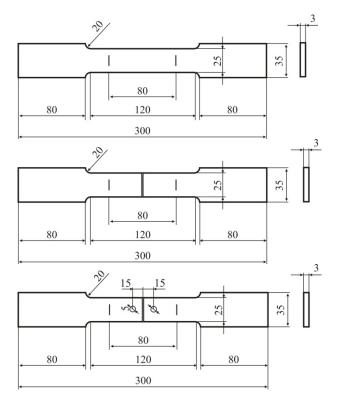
Shapes and dimensions of tested specimen bars with flat sides
